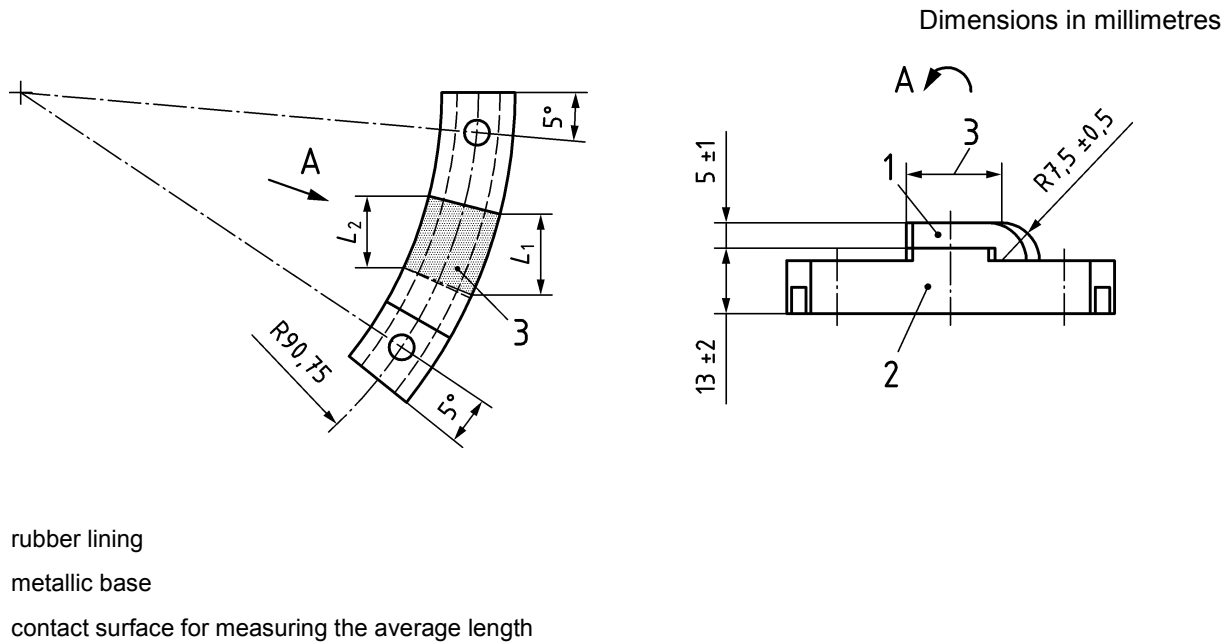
Shape of the rubber, Sliding block (plan view and cross section)
